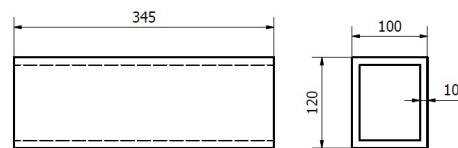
Testing Section (Section 6). Dimensions in millimeters. By the authors.
